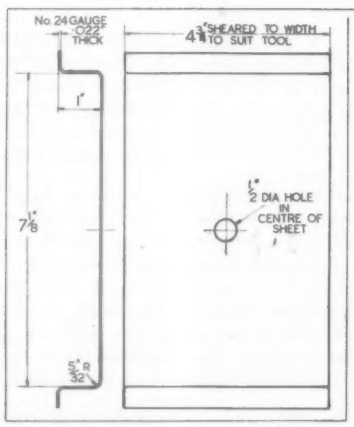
Channel-shaped sheet component in which a central hole makes a useful location
